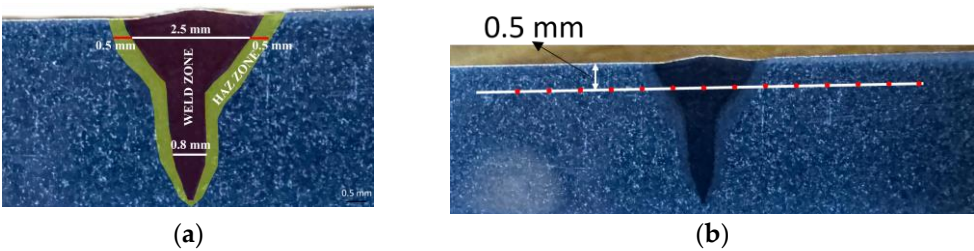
EBM-SF sample macro image representing weld and HAZ dimensions (a) and measurement depth and positions (b).
